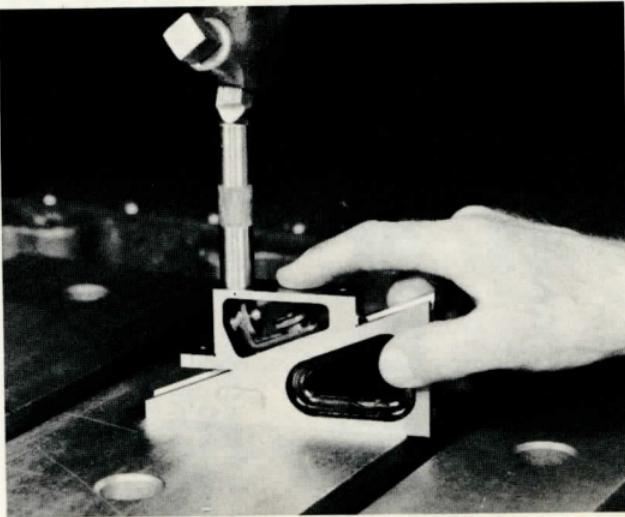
By setting a Universal Precision Gage to a micrometer, height gage or vernier caliper and then bringing the cutting tool of a planer or shaper into contact with it, the first cut may be absolutely relied upon.
